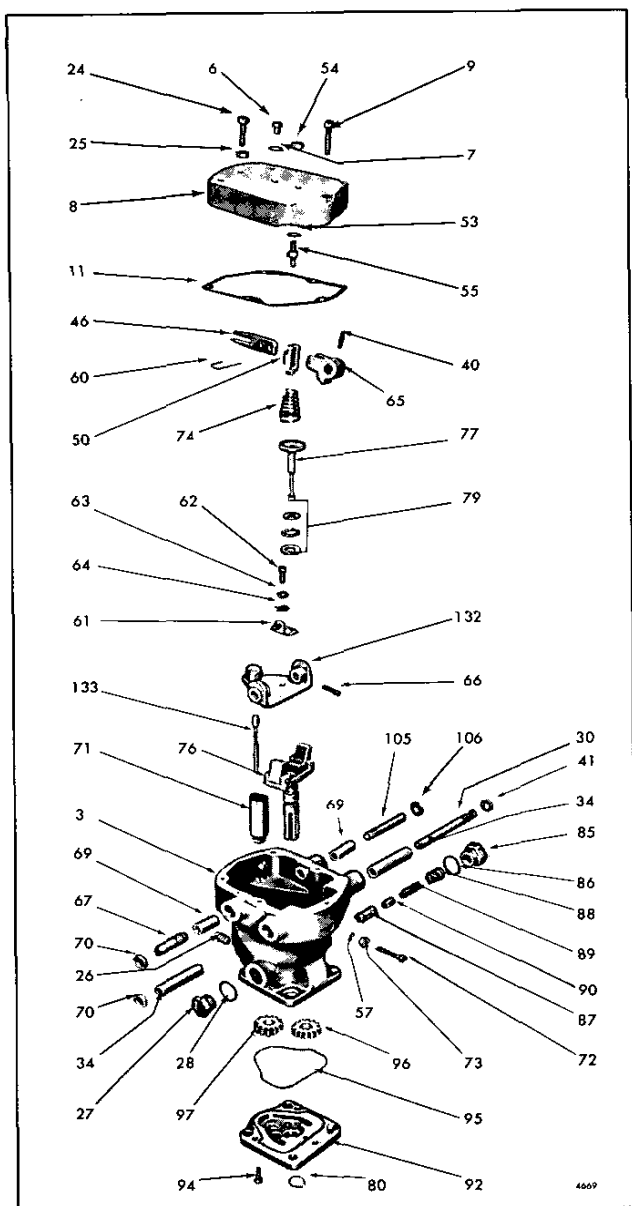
Hydraulic Governor Details and Relative Location of Parts
